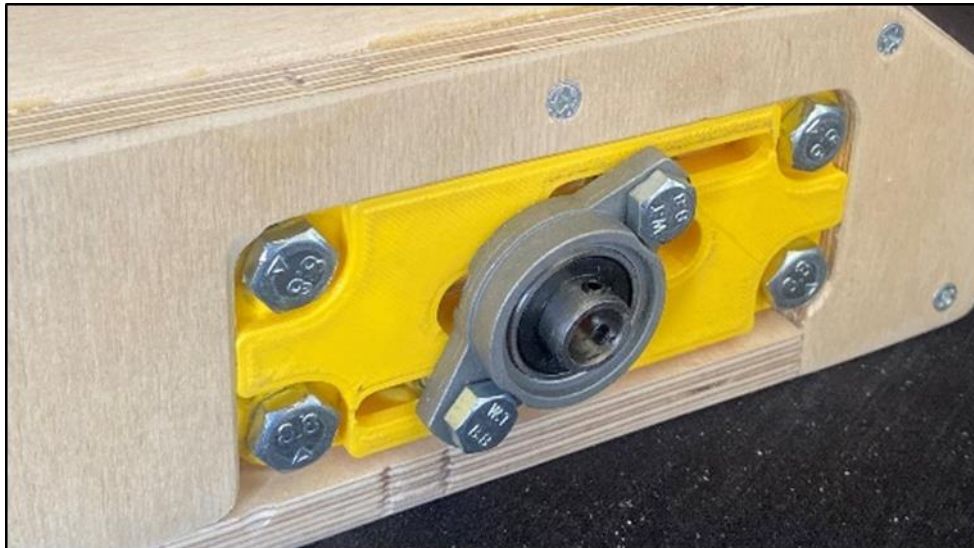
Threaded rod tension slide installed onto the chuck end of the plywood frame.
